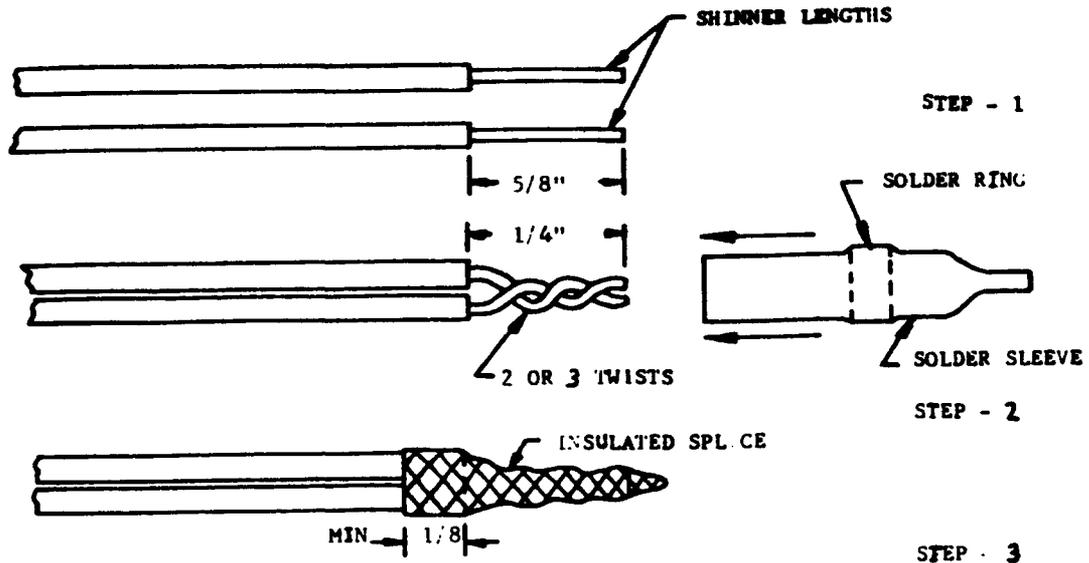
A METHOD OF MAKING IN SERVICE "Y" SPLICE WITH 702-2AR WIRE CONNECTOR
